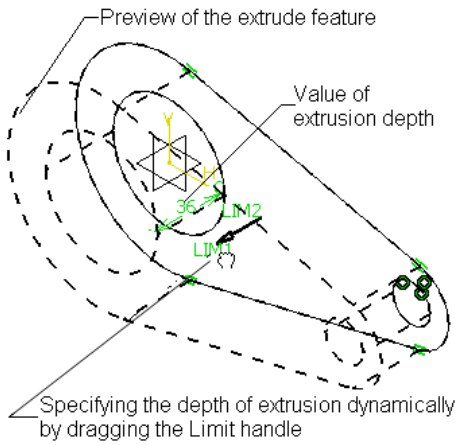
Dynamically dragging the *Limit* drag handle to specify the depth of extrusion
